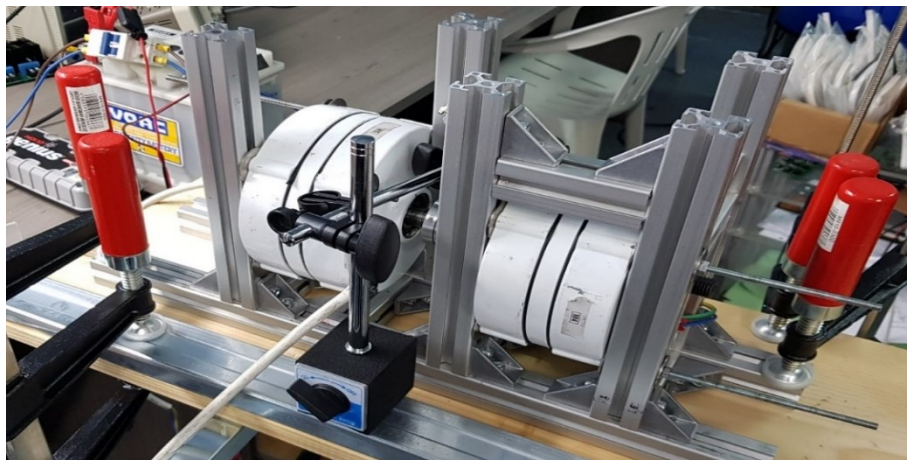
(b) – Shaft Alignment using Dial Gauge (rear view)
